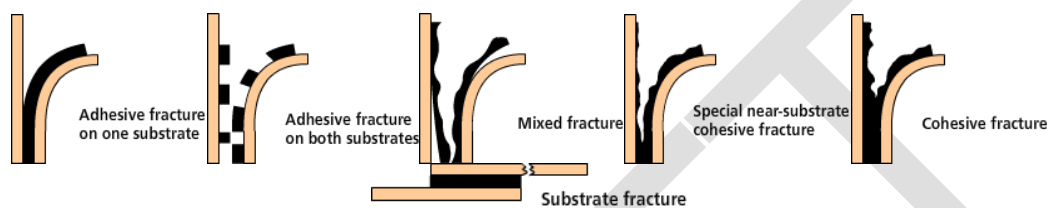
Types of fractures occurring in adhesives. Source: Fraunhofer IFAM: Adhesive Bonding – the Right Way. <https://leitfaden.klebstoffe.com/en/6-4-fracture-pattern-evaluation/>
